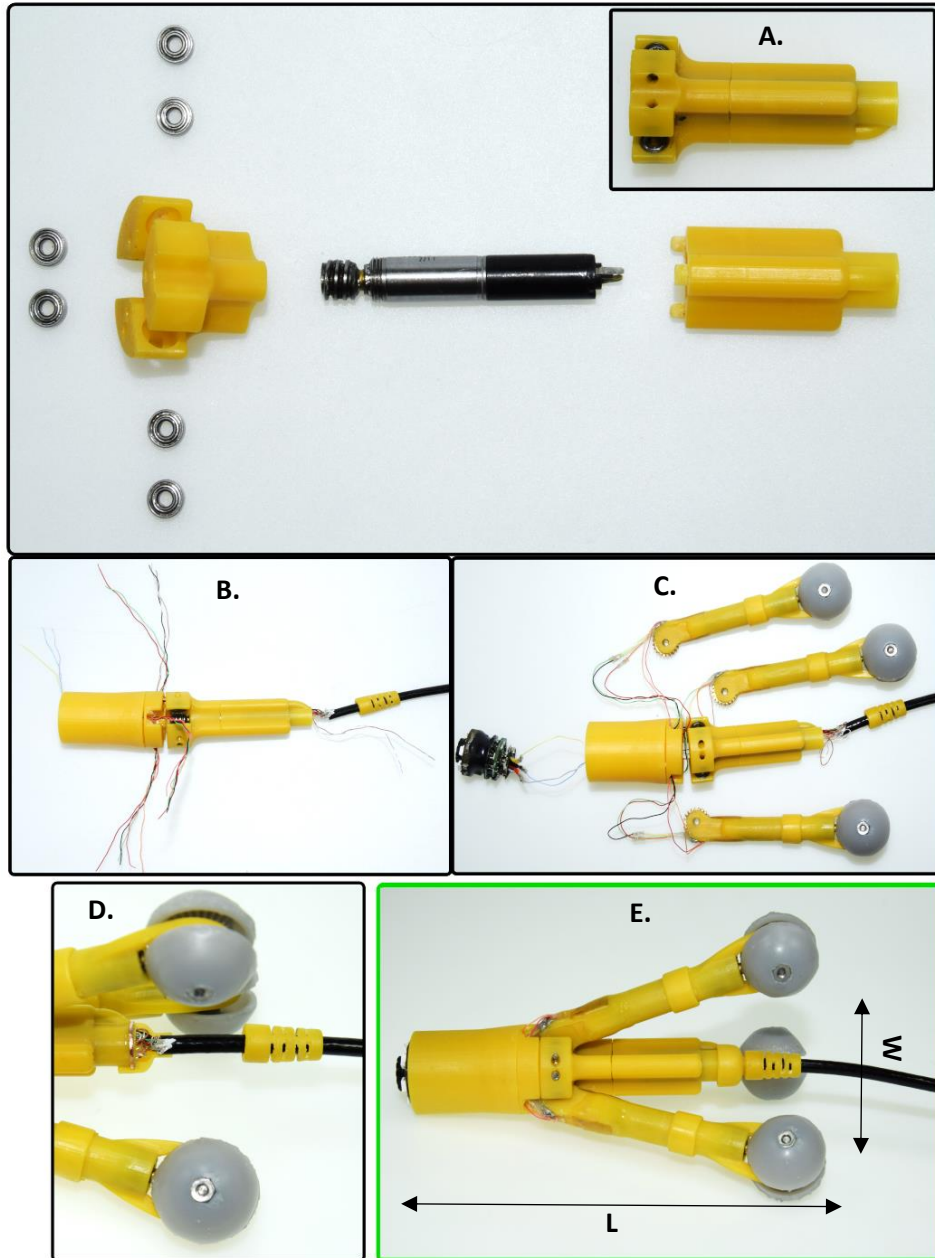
A sequence of photos taken during the assembly of the chassis and rest of the prototype.
